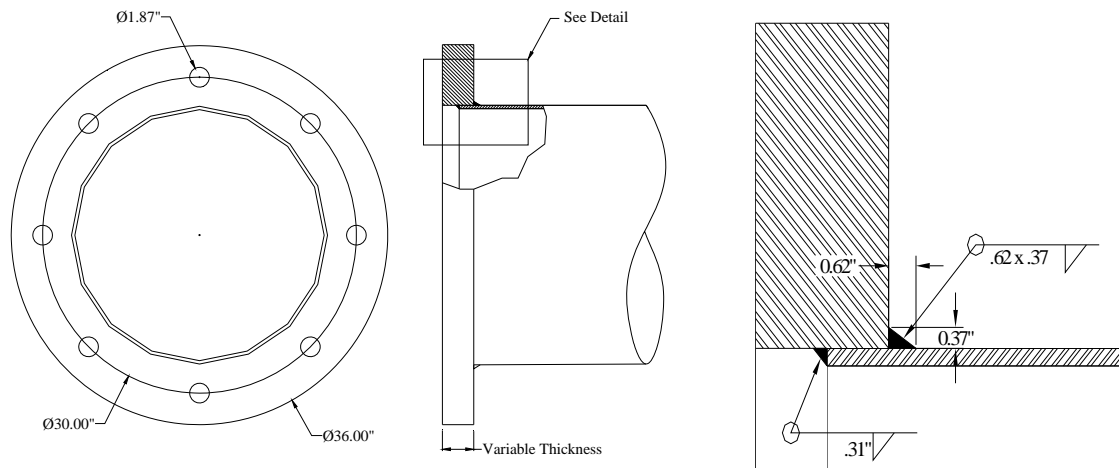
Fillet-Welded Socket Connection (Craig Rios, 2007)
